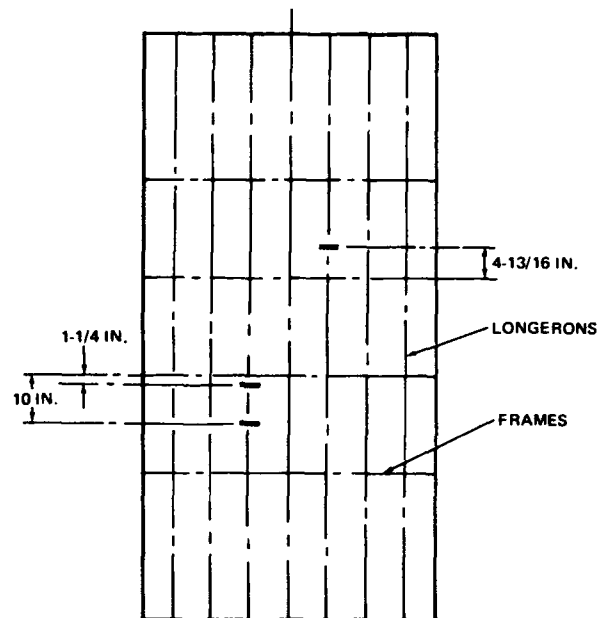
CRACK LOCATIONS FOR TESTS IN 60-IN. WIDE PANELS
